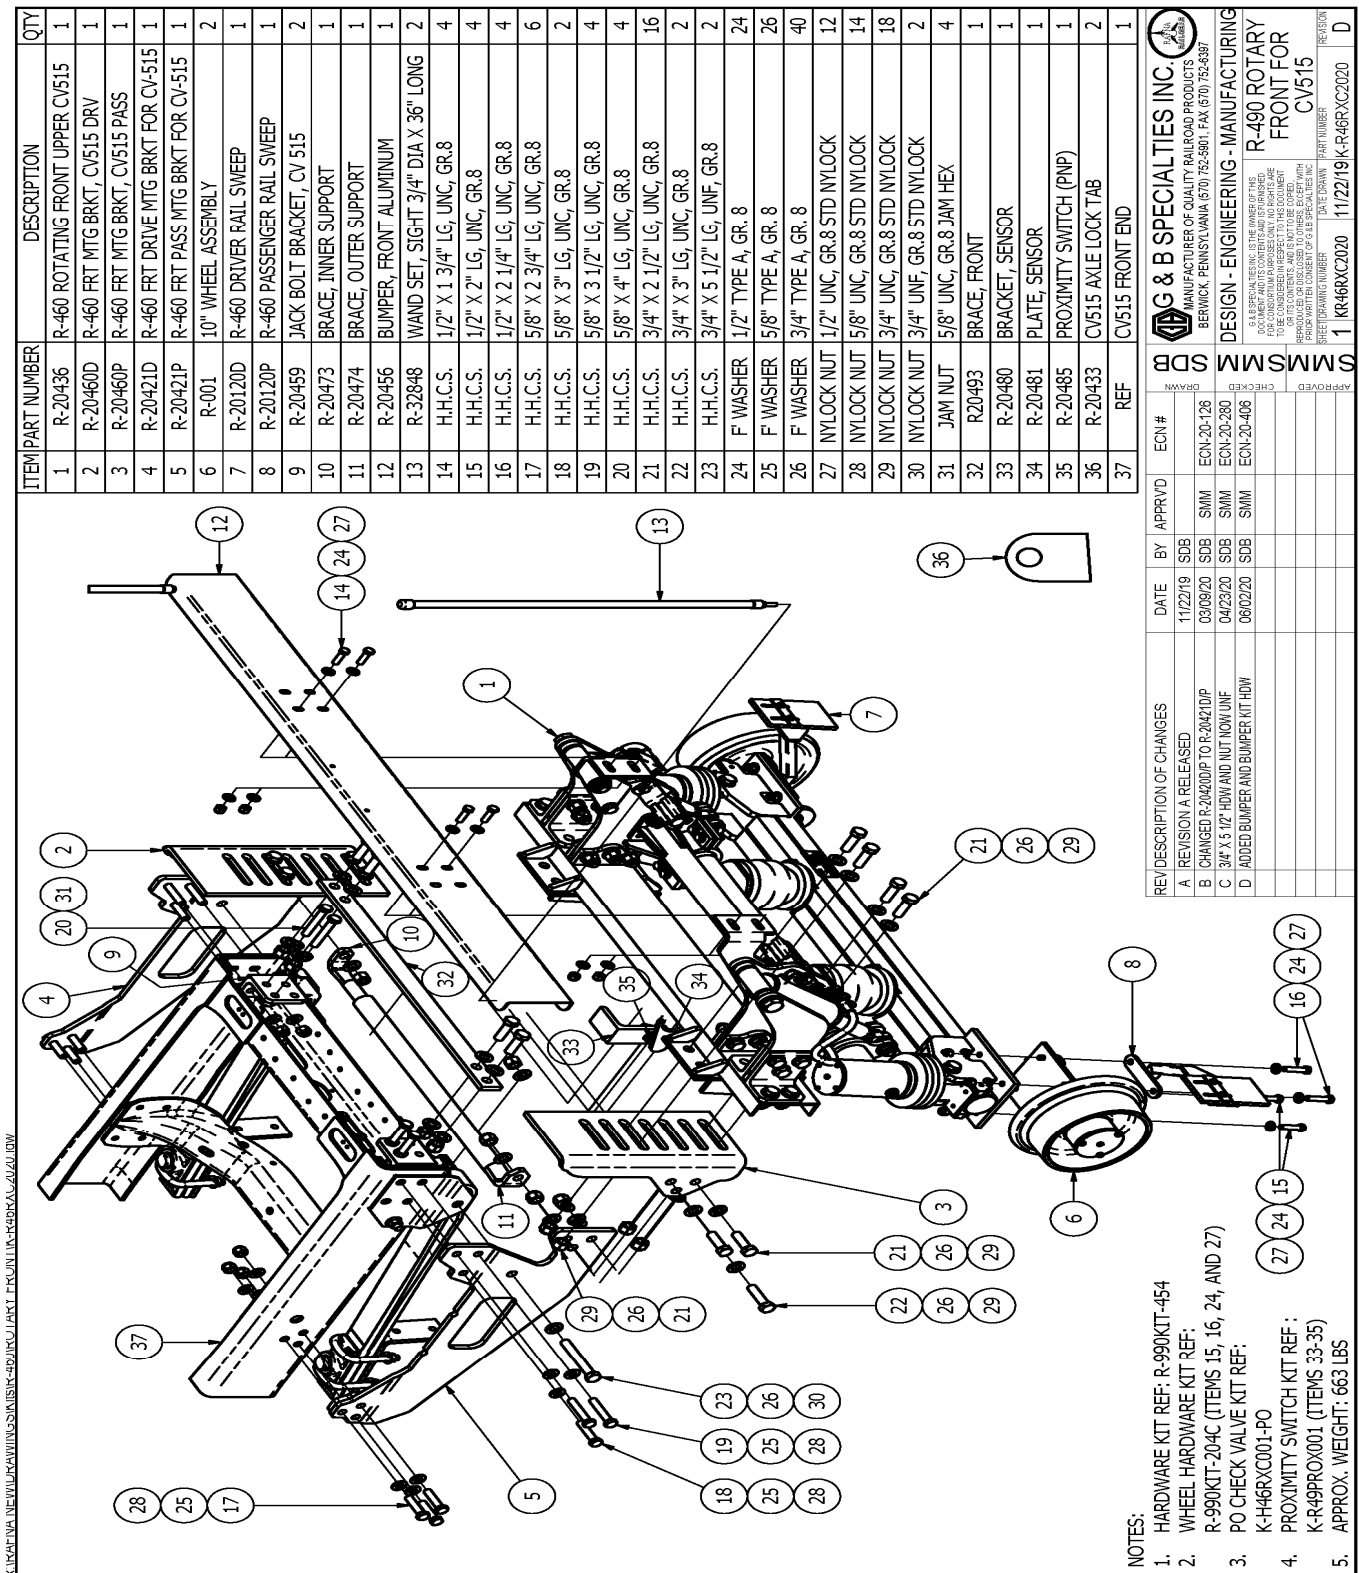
R-490 Rotary Front Railgear Complete Kit Sheet #1 (K-R46RXC2020)
